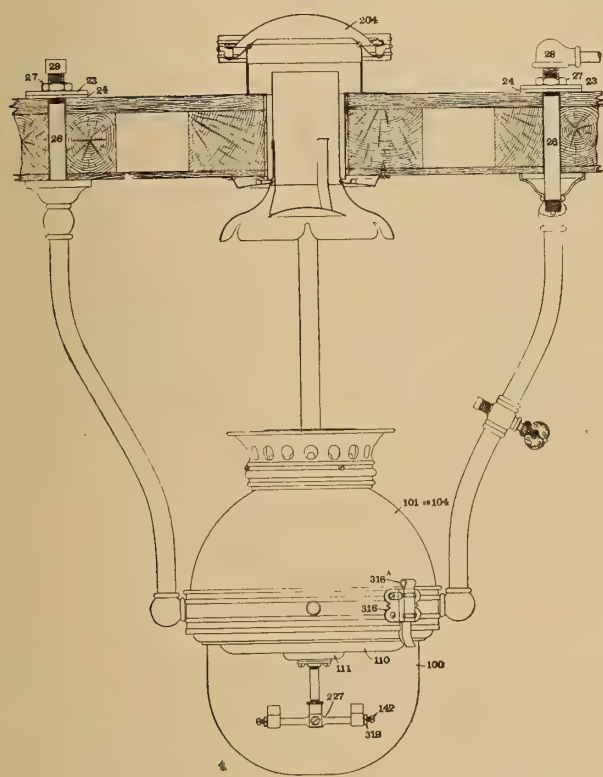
METHOD OF HANGING FOUR-ARM LAMP.
